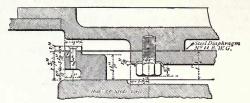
Slide-valve relief-frame on steam-chest cover.
